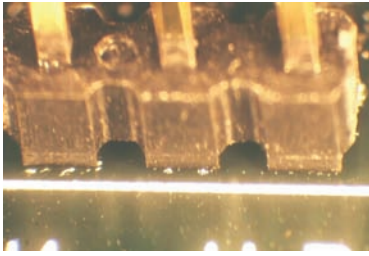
Types of solder balls that can be produced after reflow soldering.
